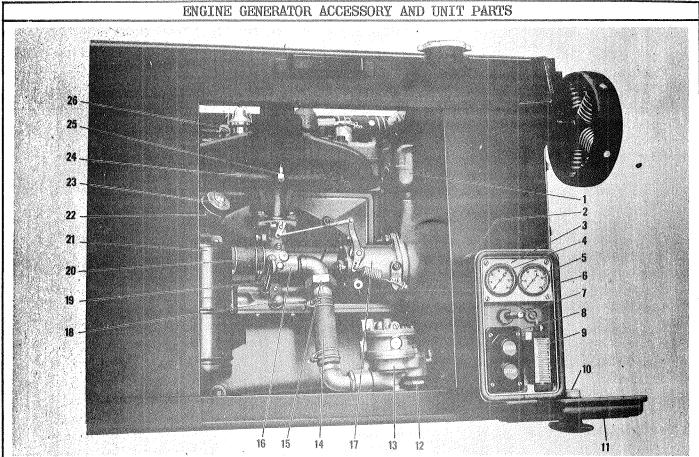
CARBURETOR SIDE VIEW OF ENGINE-GENERATOR
